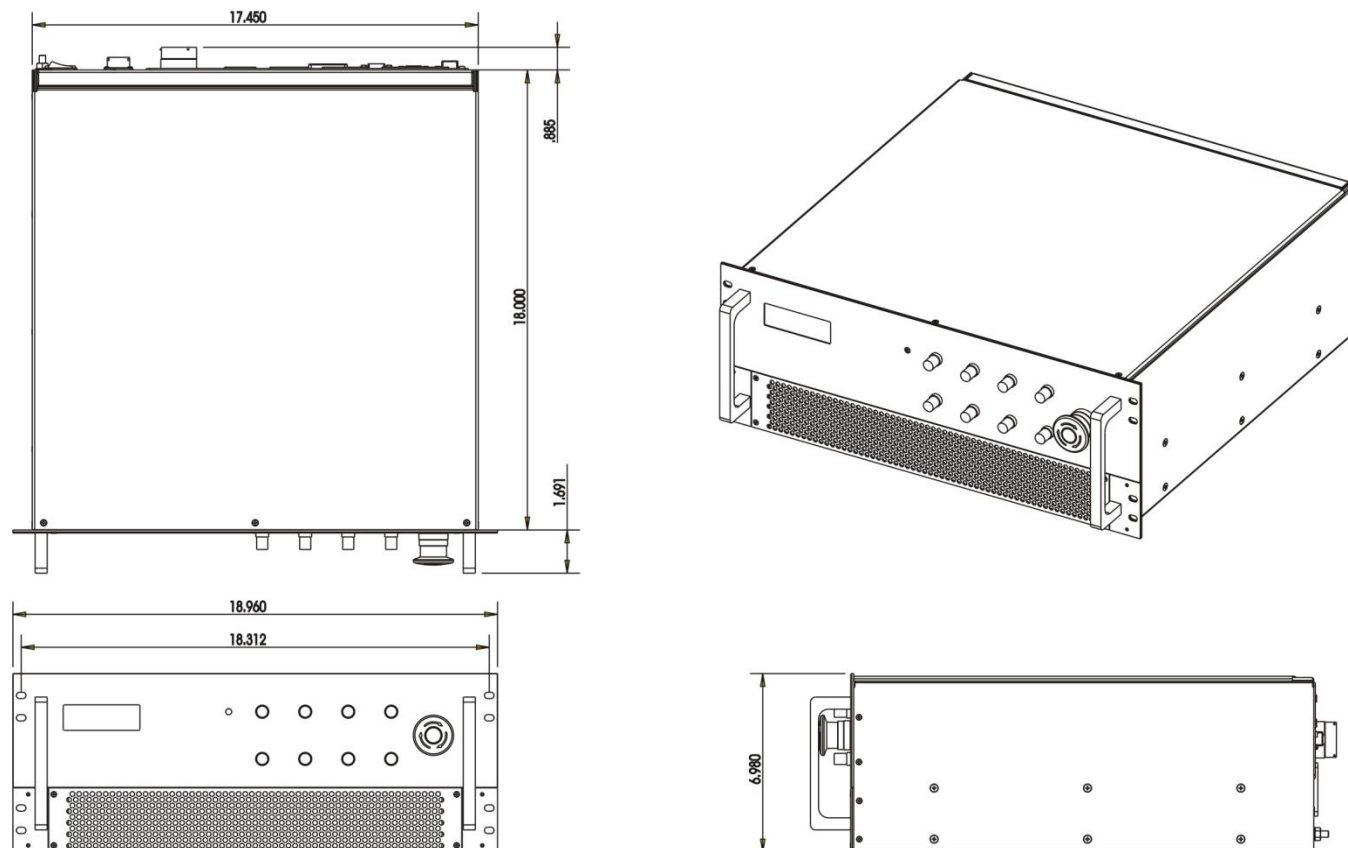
DIMENSIONS OF THE MB4150g5-PC CONTROLLER
